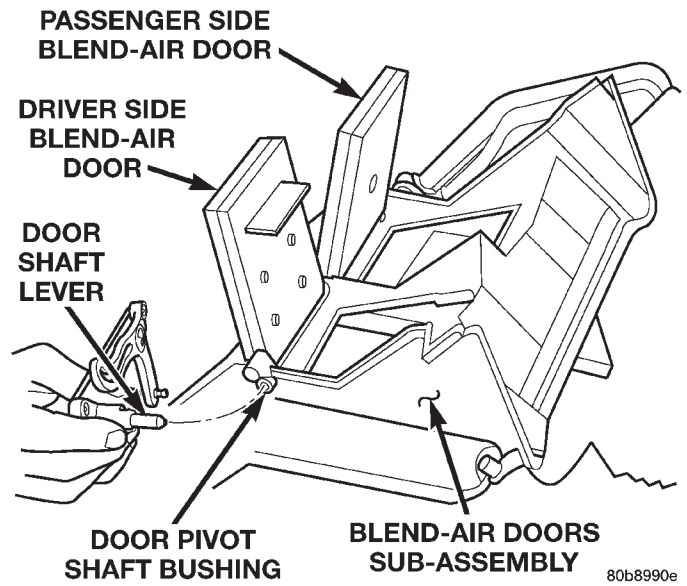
Blend-Air Doors Sub-Assembly (AZC)
